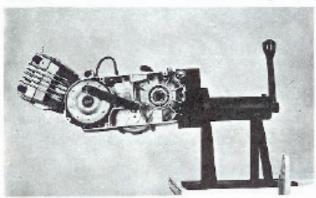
With the flywheel and magneto held by the wrench #4, remove the variable speed clutch.
